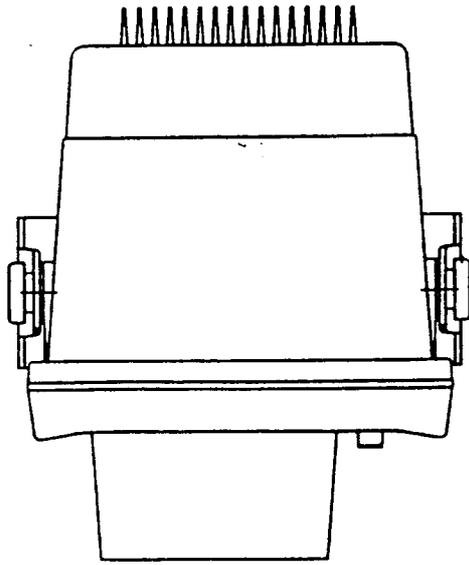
OUTLINE DRAWING OF R41X SCANNER UNIT
